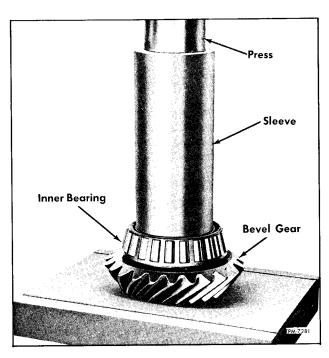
Installing Bevel or Pinion Gear Inner Bearing
